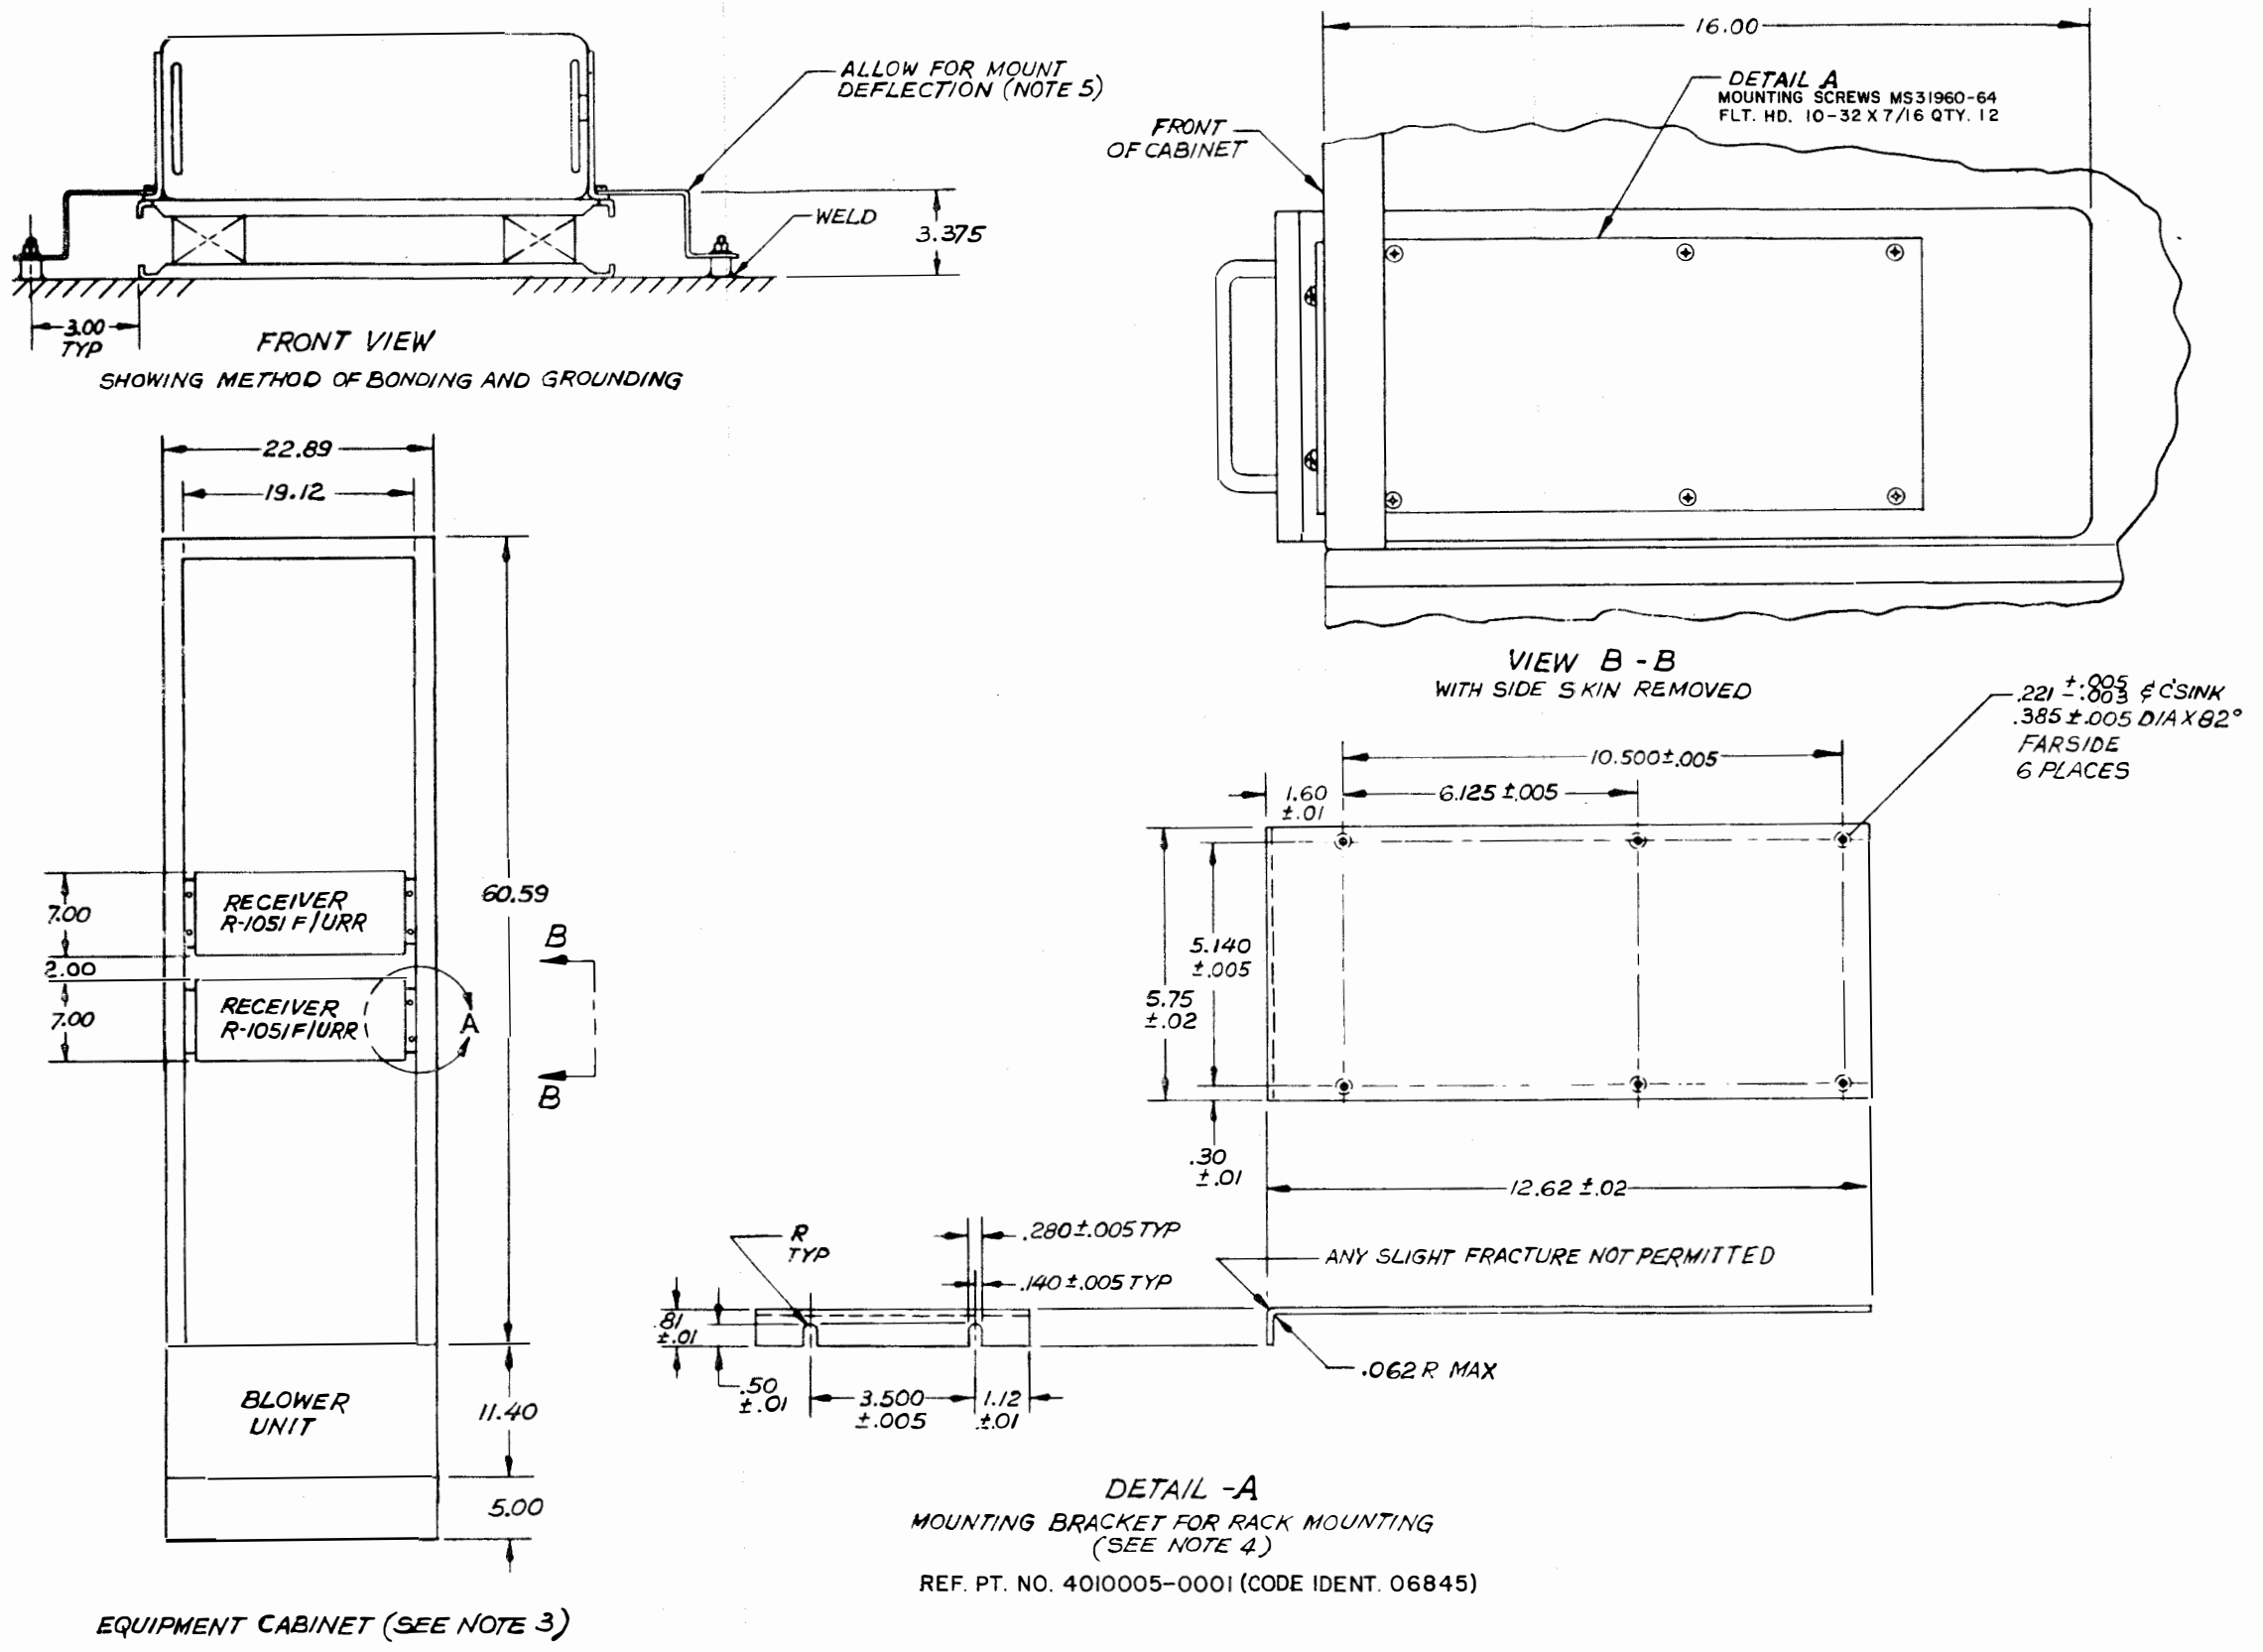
Radio Receiver R-1051G/URR, Outline and Mounting Dimensions (Sheet 2 of 2)
